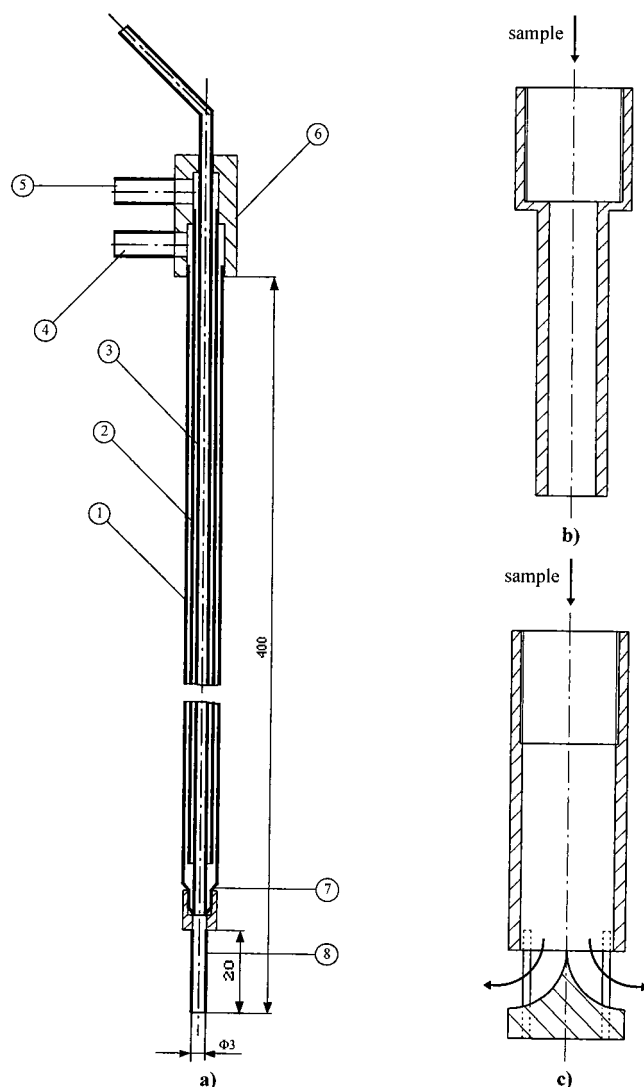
(a) Coal injection probe: (1) outer tube (o.d. $\frac{5}{16}$ in.); (2) middle tube (o.d. $\frac{3}{16}$ in.); (3) inner tube (o.d. $\frac{1}{8}$ in.); (4) water outlet tube; (5) water inlet tube; (6) hollow brass block; (7) stainless steel piece welded to outer and inner tubes; (8) tip. (b) Injection probe tip for axial injection. (c) Modified injection probe tip for radial injection.
